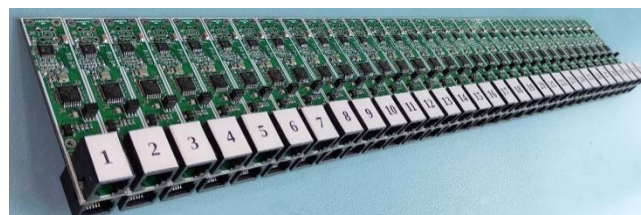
View of composite 32 PCBs of ultrasound probes.
